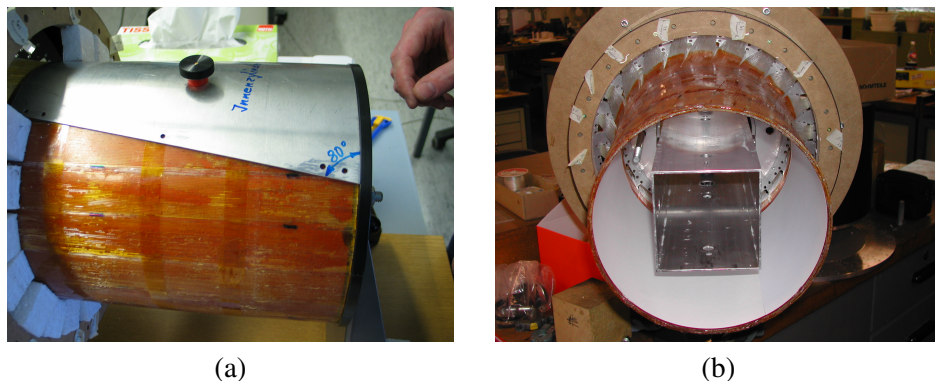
Assembly of a dummy barrel to prove assembly scheme:
